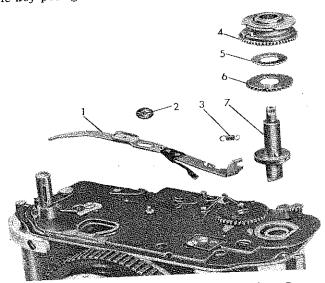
Parts on Mechanism Plate, Exploded from Camera
